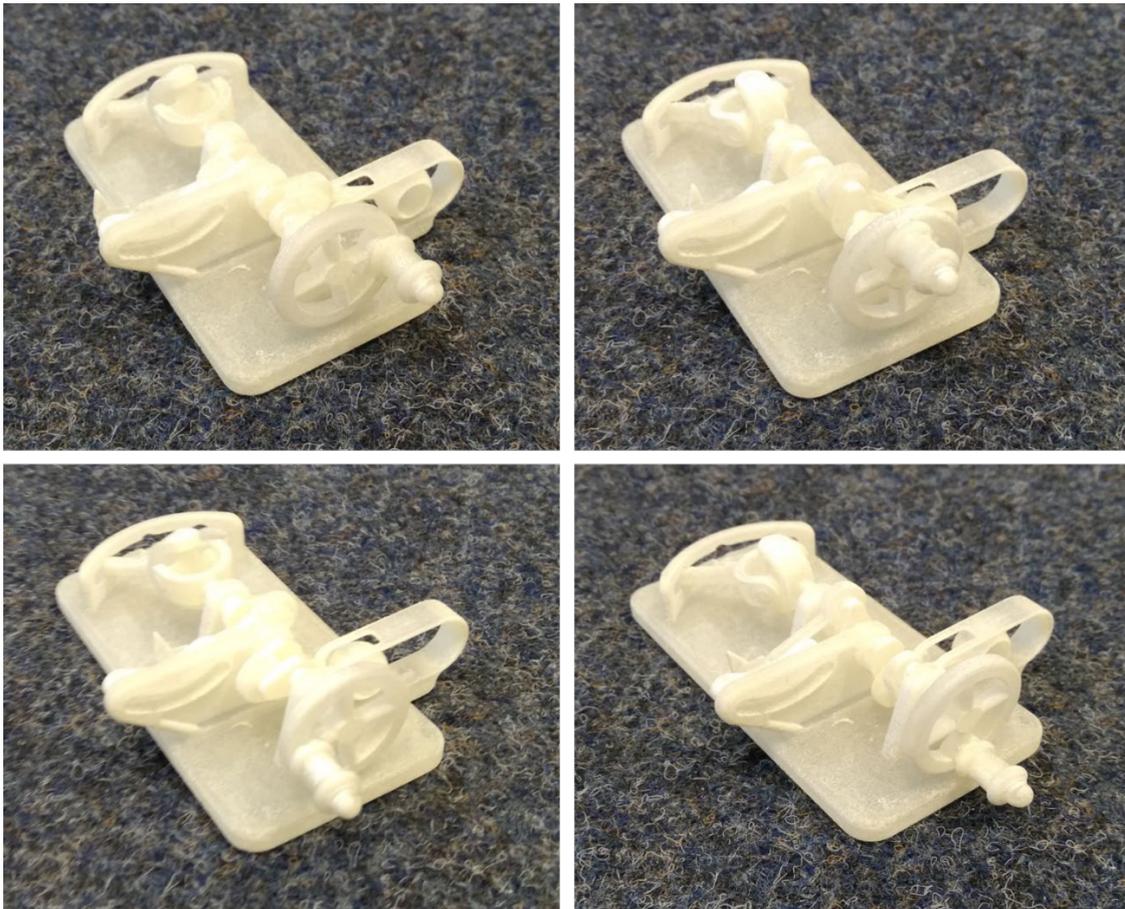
Movable, printed parts: see handle in the lower right corner of the pictures (multi-jet modelling on a 3D Systems ProJet 3510 HD Plus)
